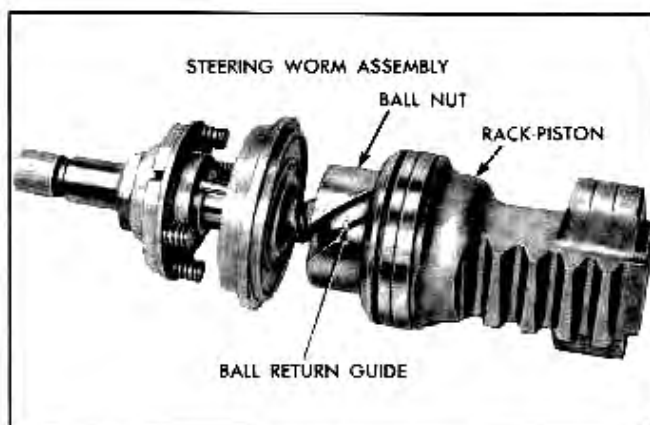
Ball Nut and Steering Worm Assembly Removed from Rack Piston
